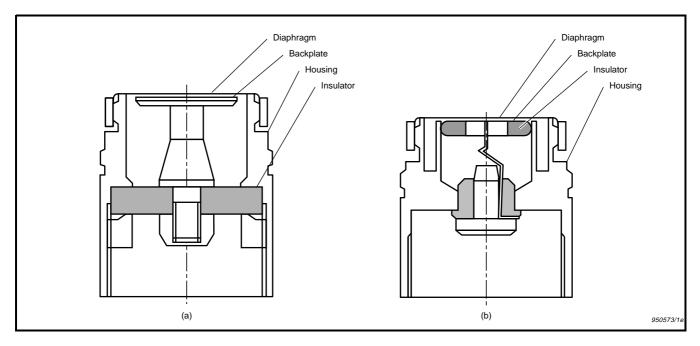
Cross-Sectional view of microphone types. The classic type (left) is assembled by screwing the parts together. The new type (right) is assembled by pressing components together. The design is patented by Brüel & Kjær
